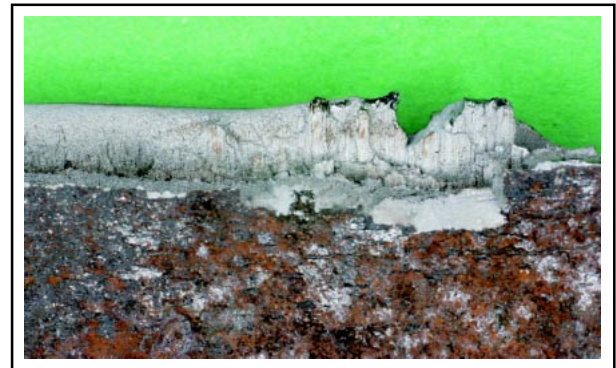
Woody fracture at the midplane can be seen in this view of fracture in exemplar spring B.
